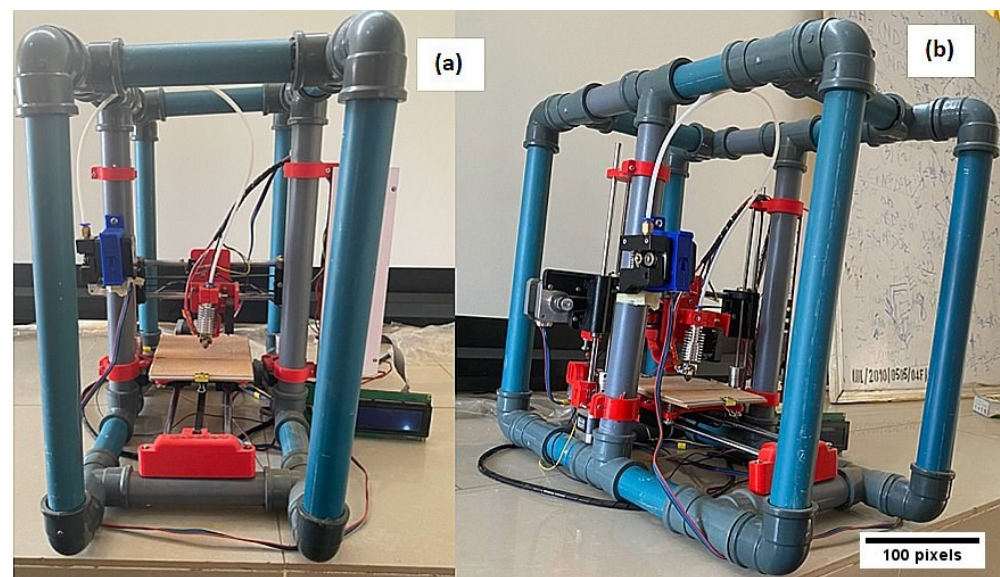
The constructed 3D Printer—(a) front view and (b) side view.
